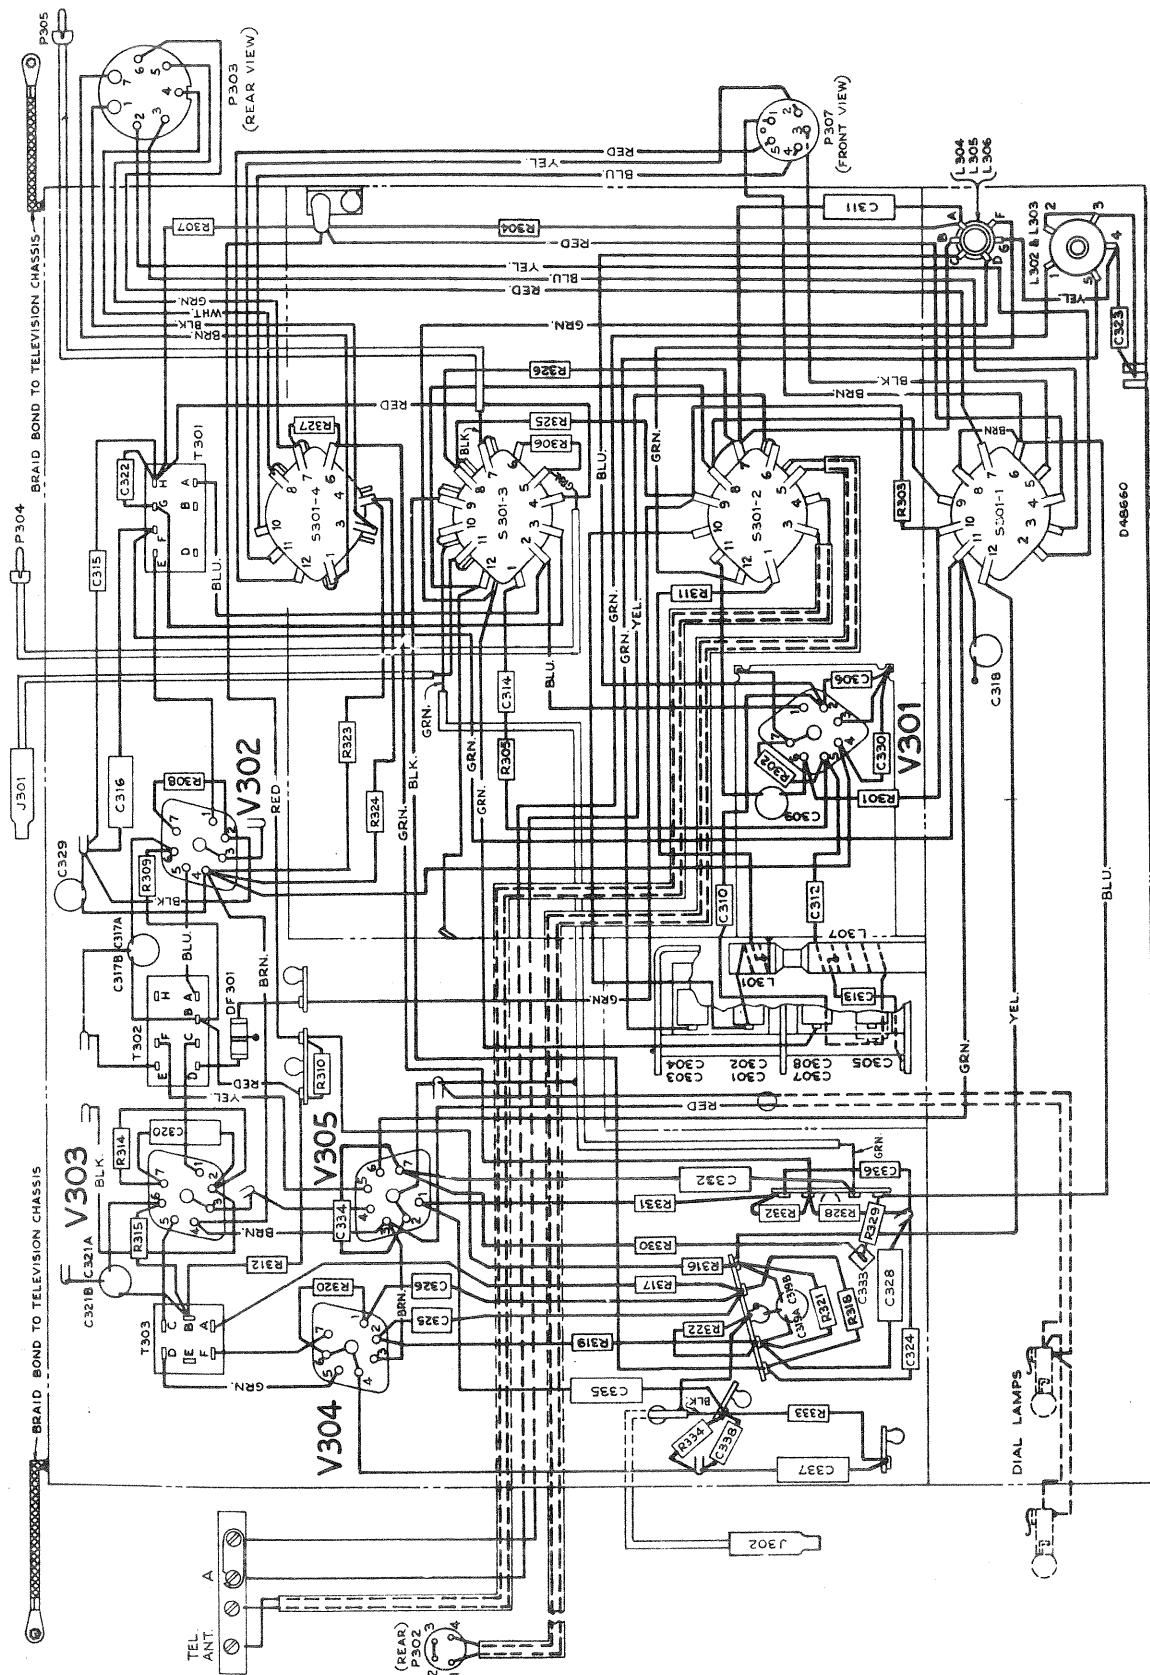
Radio Chassis Wiring Diagram (RK135C)
